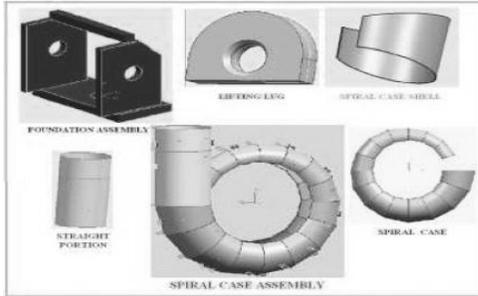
3-D geometry of Spiral Case Assembly and Sub Assemblies
